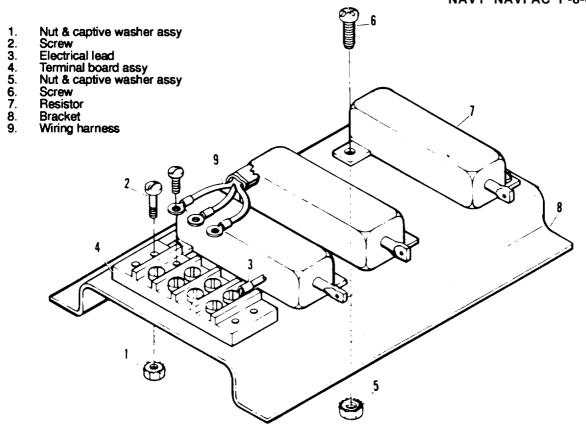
Tactical Relay Resistor Assembly, Exploded View
